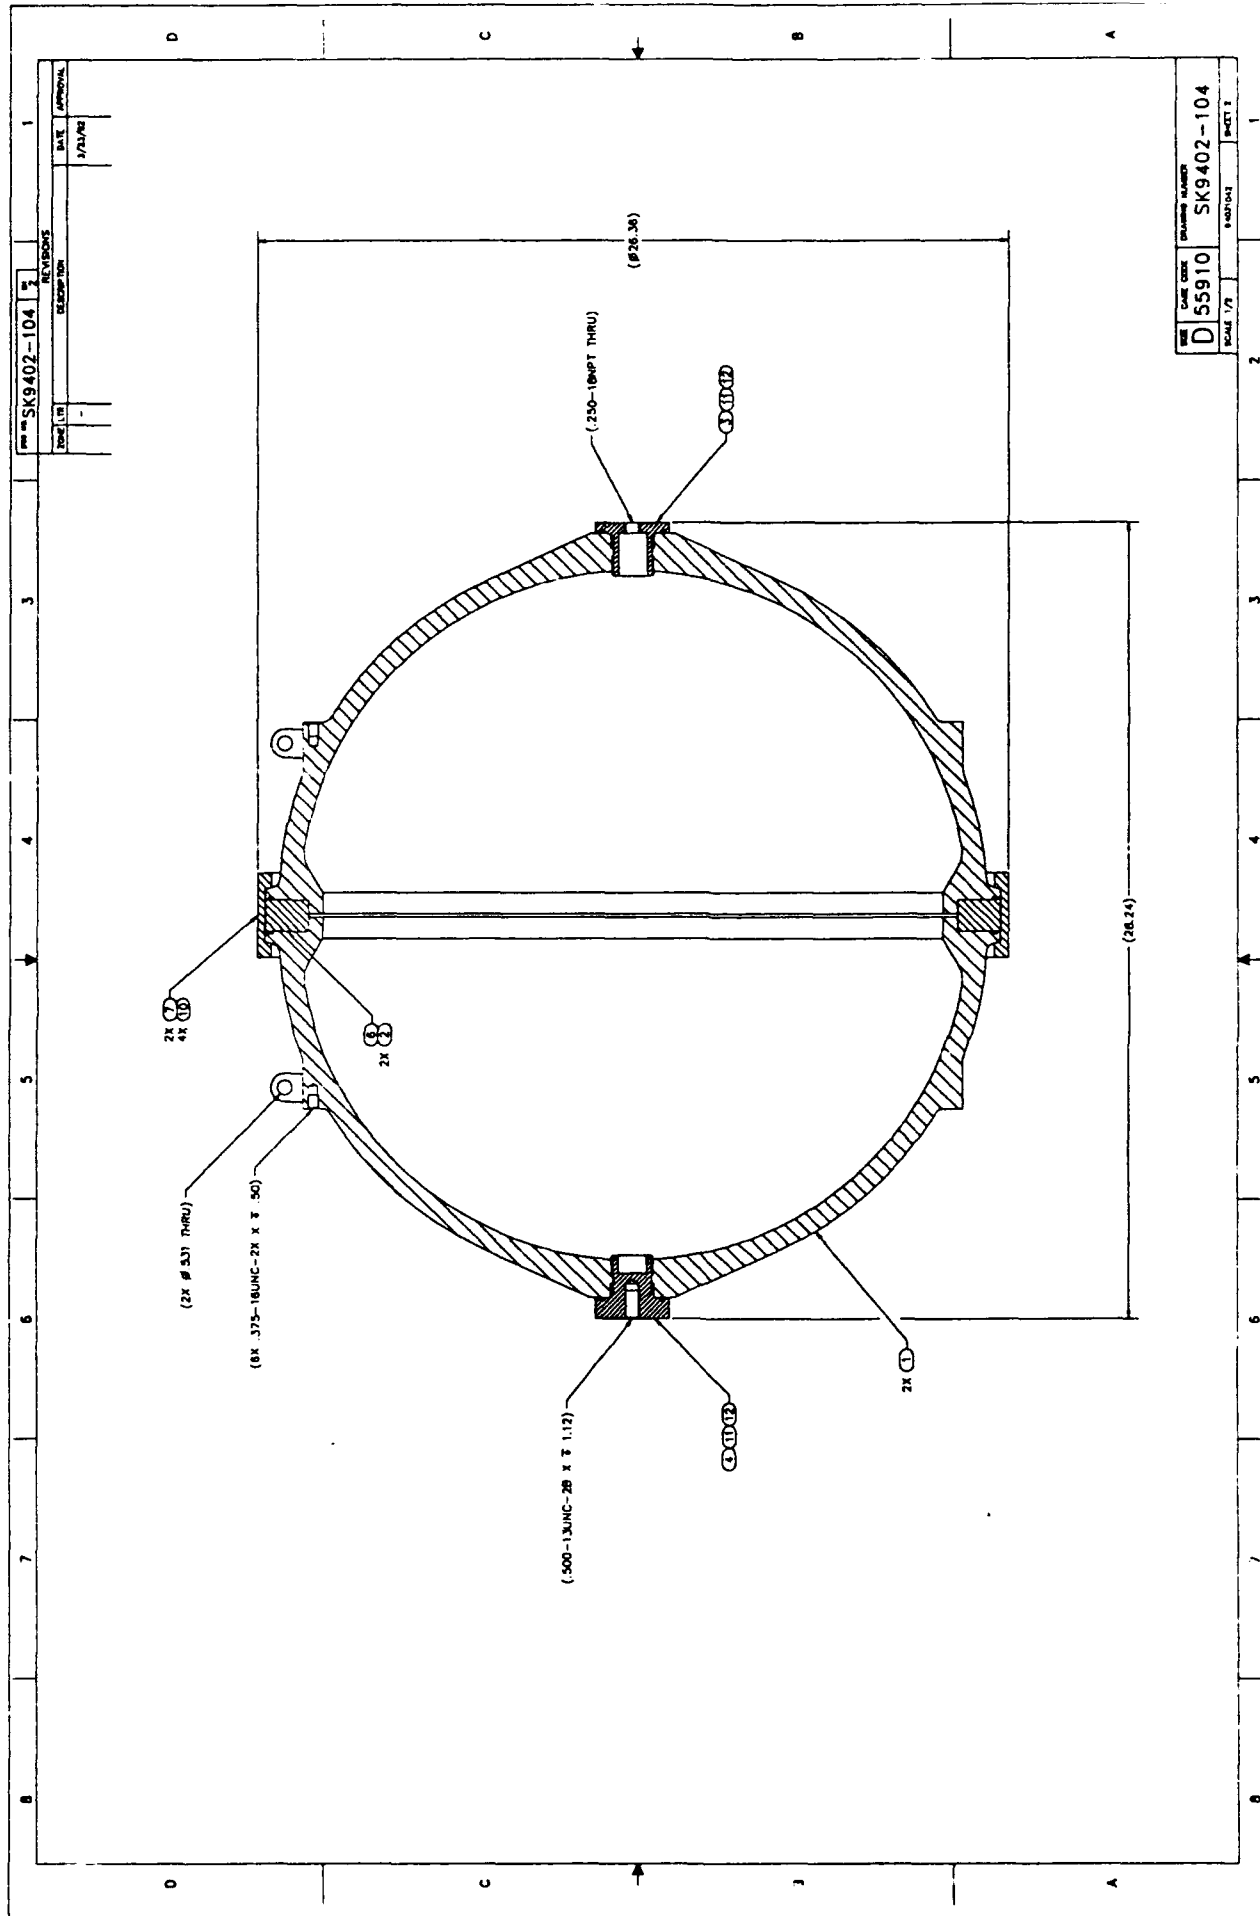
Proof configuration for 26-inch-housing test hemispheres, sheet 2.
